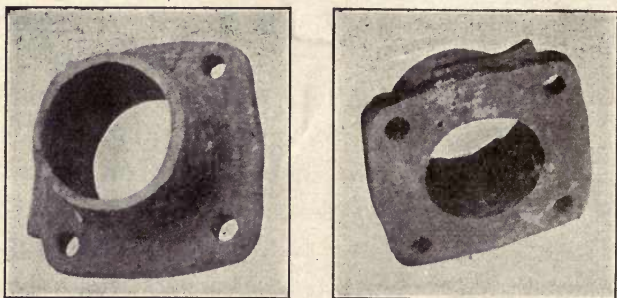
Pieces of Cast Iron Pipe from an Underground Line Installed Prior to 1685
